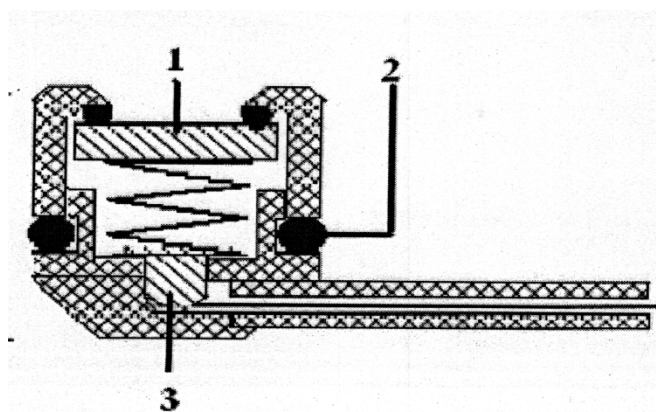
The specimen holder 1. Specimen 2. Seal 3. Electrical connection
